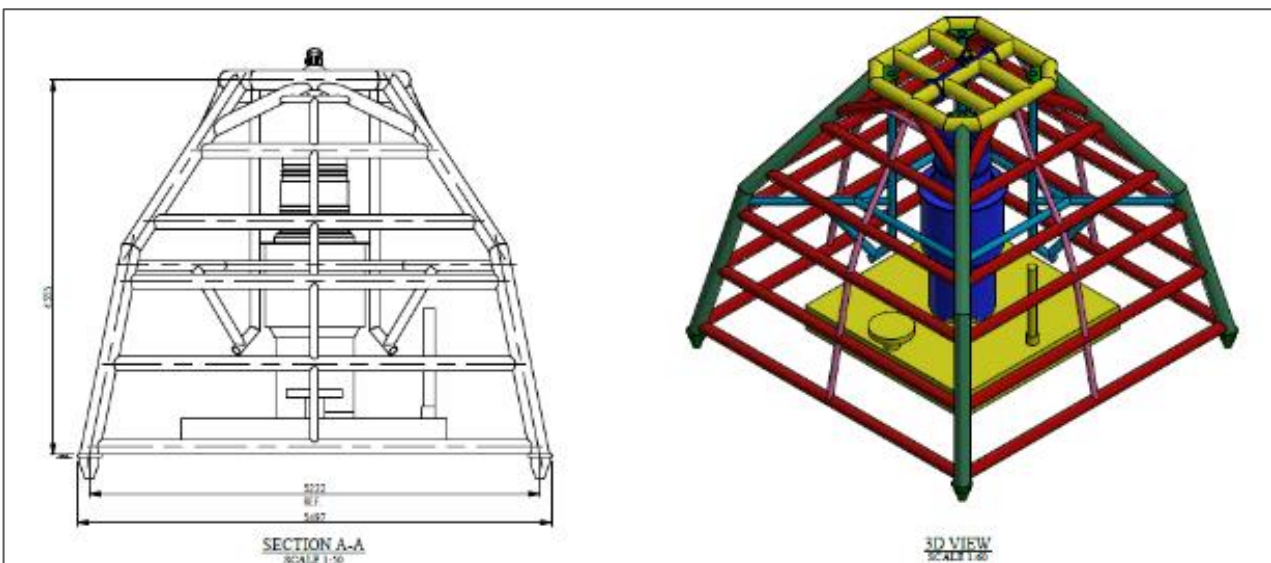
EXAMPLE OF OVER-TRAWLABLE CAP TO BE INSTALLED ON WELLHEAD ON SEA FLOOR
